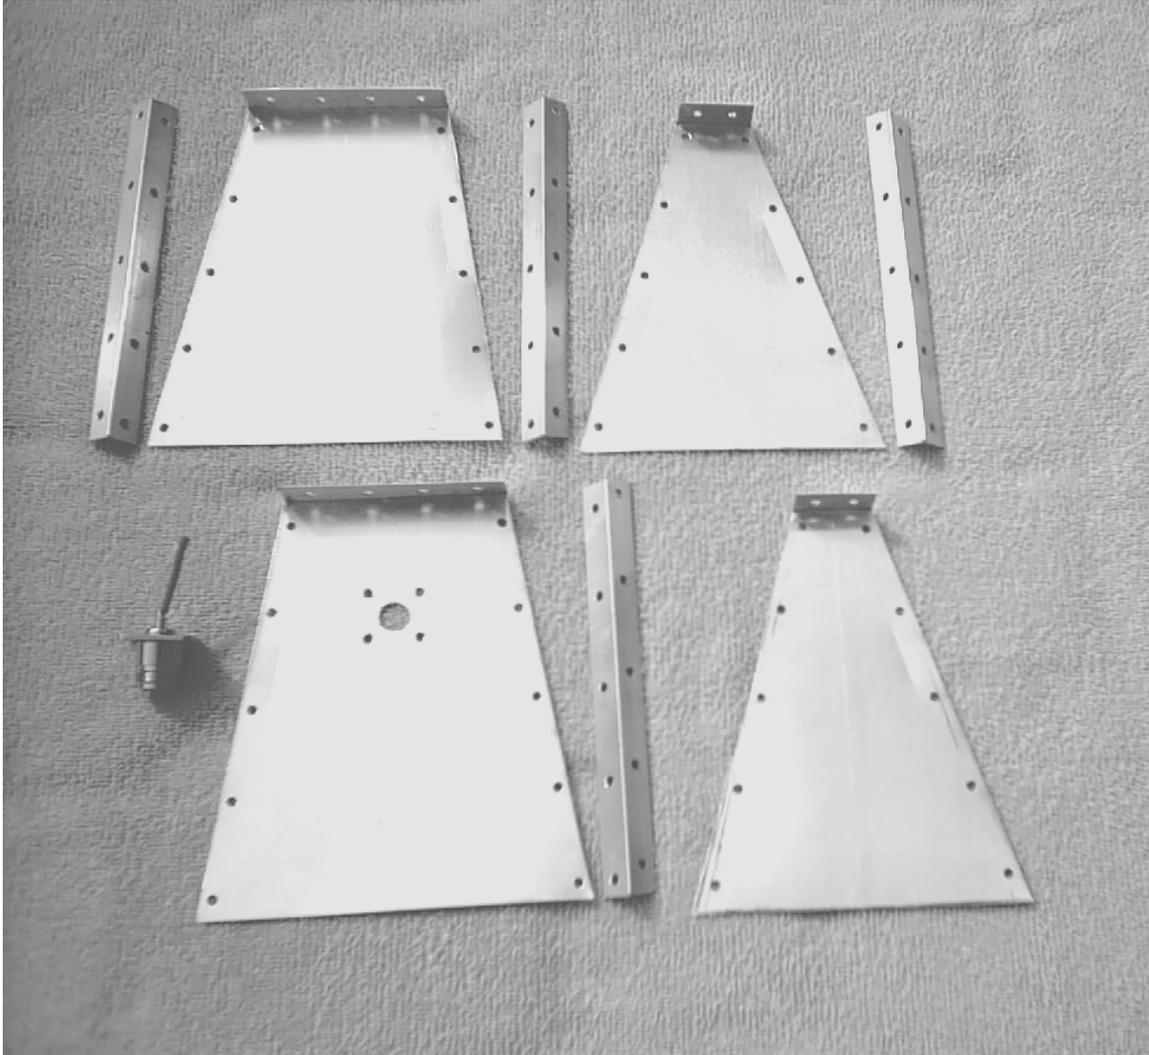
Horn side panels, angle-stock, side seams, and N-connector with probe before assembly side seams, and N-Connector with coupling probe are shown as they looked before assembly in Figure 7.
